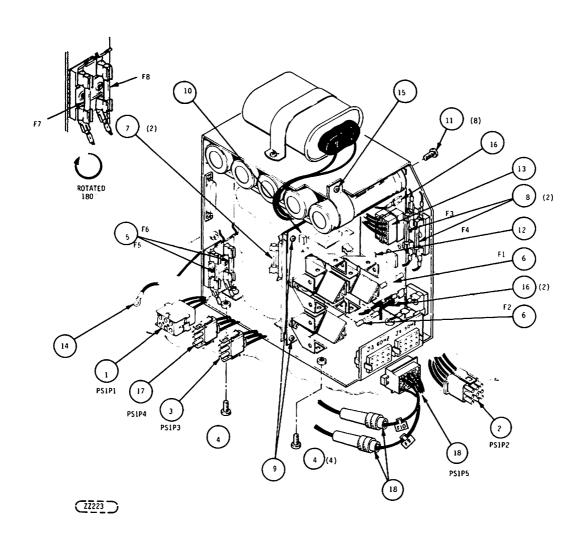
50/60 HZ POWER SUPPLY ASSEMBLY
